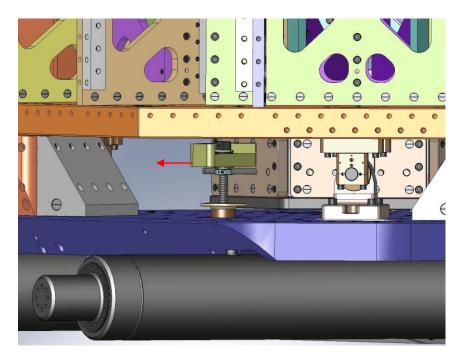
Pull out the bottom part of the (3) Pull-Down Assemblies, and store with the rest of the Assemblies.
